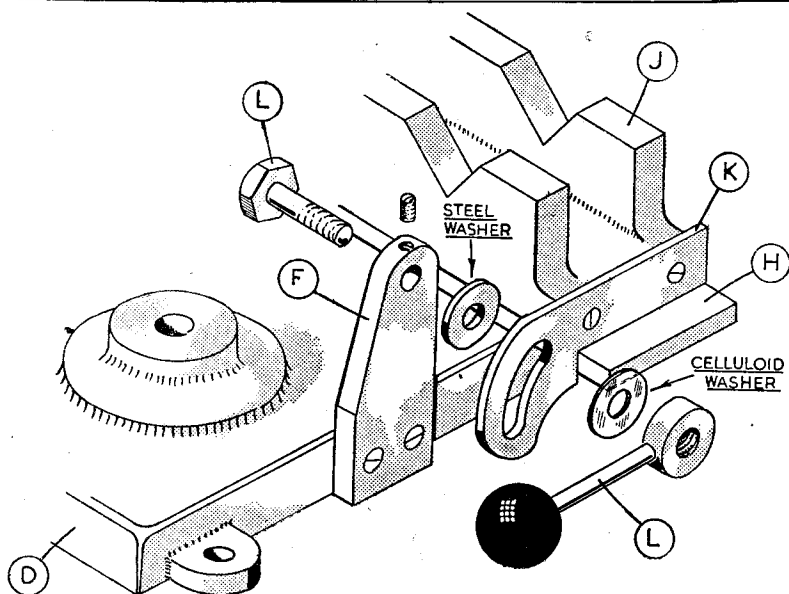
The baseplate and table assemblies. "D"—baseplate; "F"—base clamp-plate; "H"—pivot table; "J"—lower V-block; "K"—quadrant; "L"—quadrant clamp-bolt
